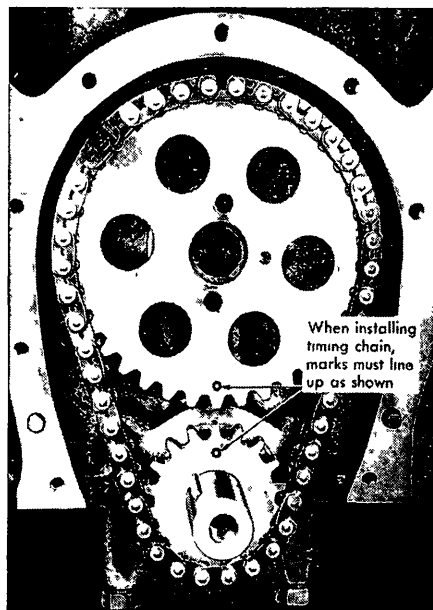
Showing timing marks lined up for correct valve timing on 1949-52 engines
